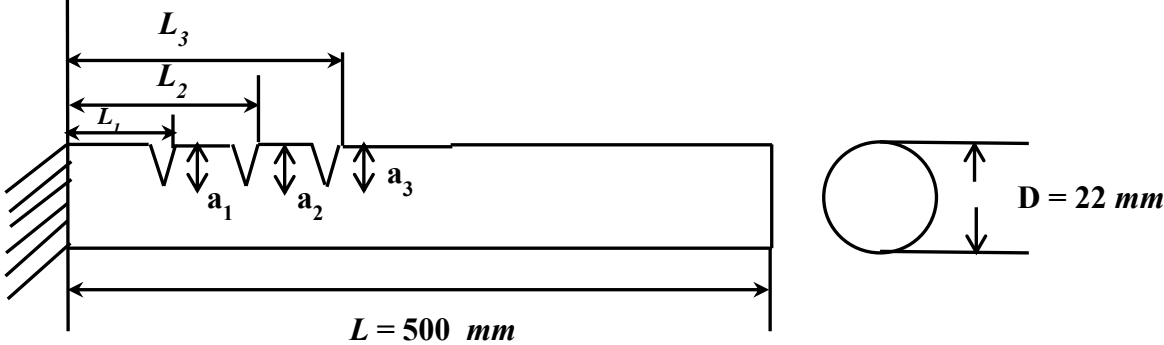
Sketch of multiple cracked uniform cantilever beam of circular cross-section
